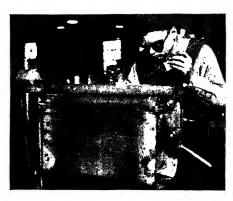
Jigs facilitate production welding operations by keeping the parts in correct alignment.
